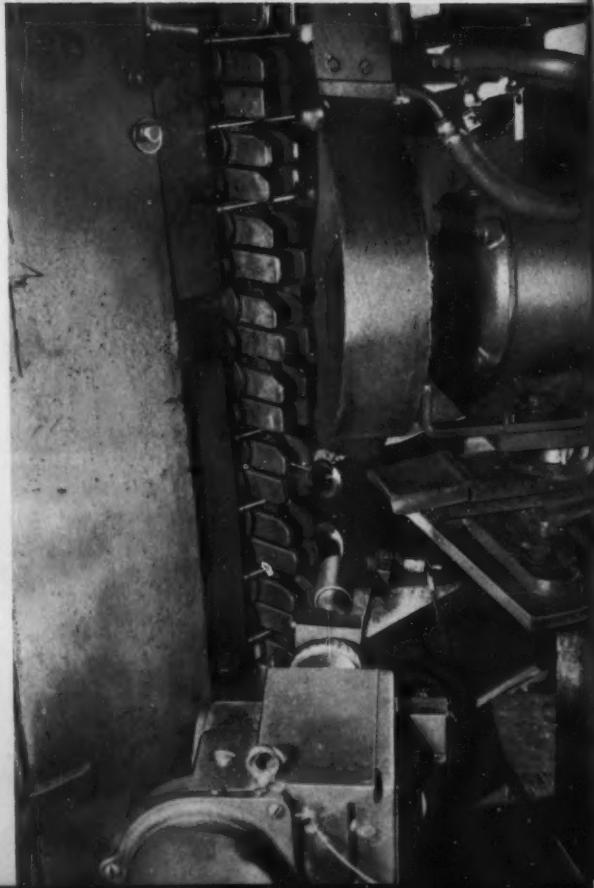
Close-up view of the metal-spraying station on the machine shown in Fig. 7. The aluminum coating applied is about 0.0007 inch thick.
